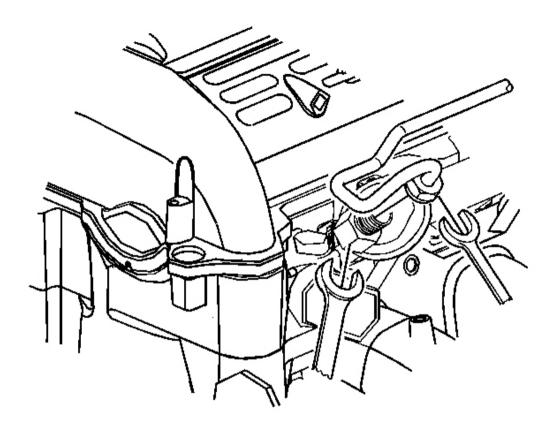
View Of Fuel Line Bracket & Bracket Bolt Courtesy of GENERAL MOTORS CORP.
